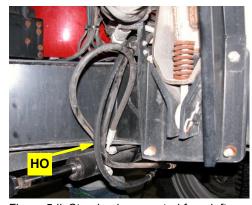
ii: Steering hose routed from left steering cylinder to steering block
